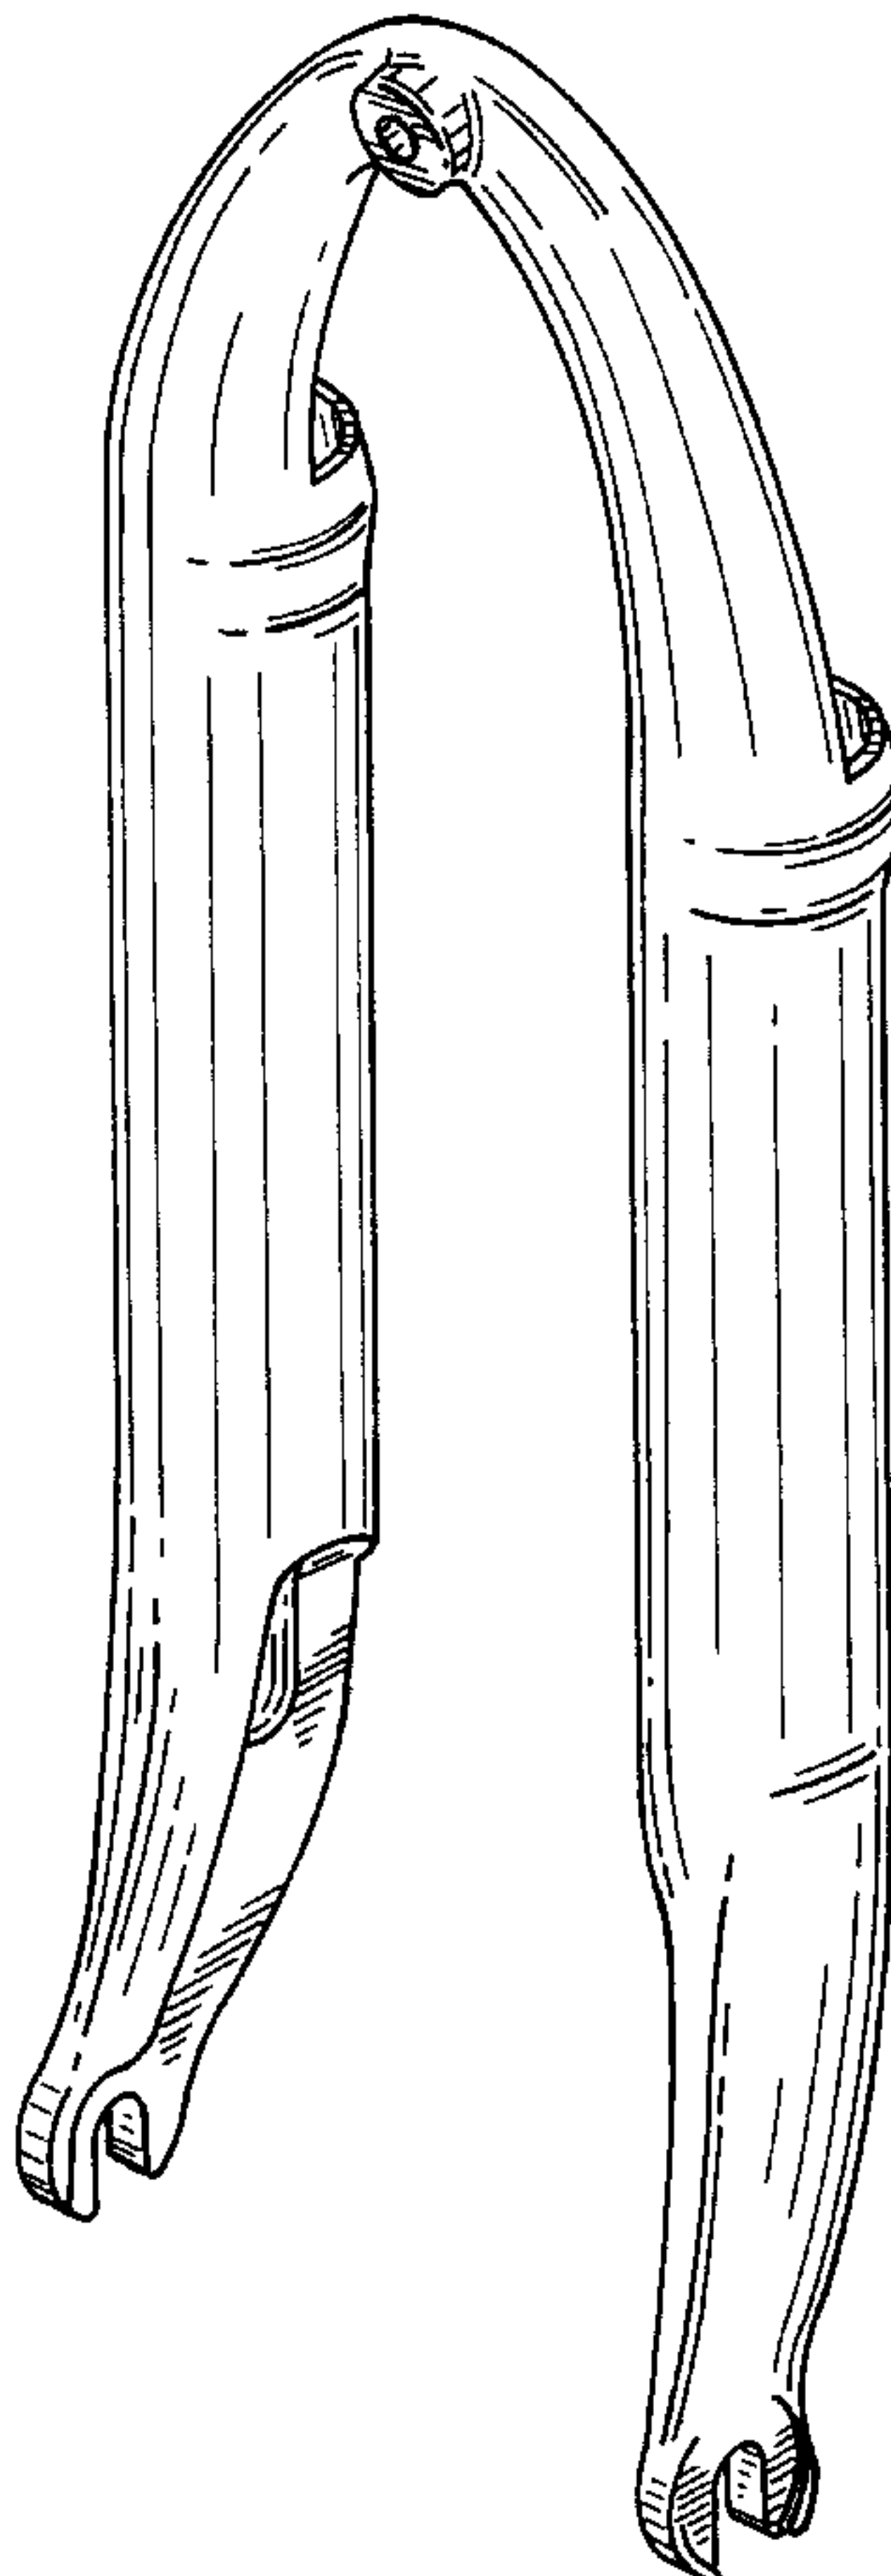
is a perspective view of a bicycle front fork lower tube assembly showing a second embodiment of my new design having a dropout with rounded inner side;
